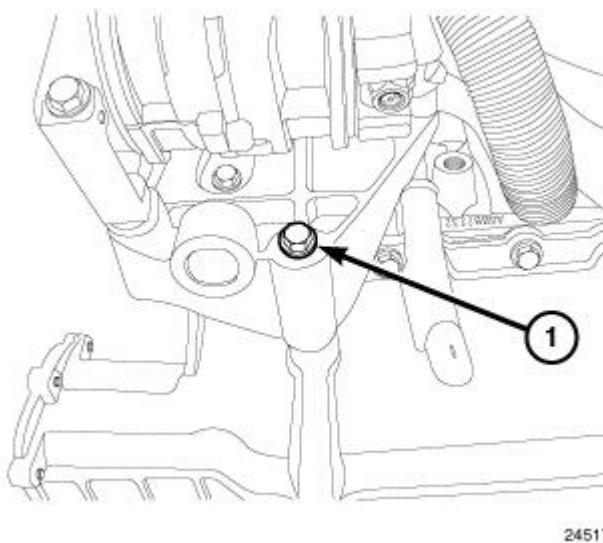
A/C Compressor Mounting Bracket Lower Bolt
